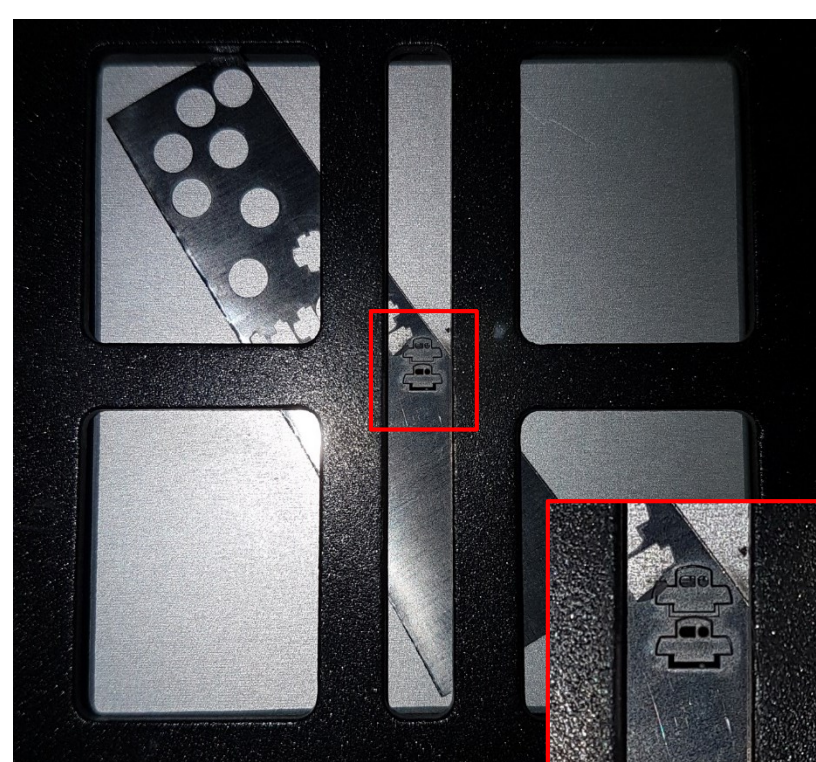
$50 \mu\text{m}$ thick tungsten film mounted onto the microPREP cutting fixture. Custom 3 mm grid has been laser cut, shown outlined in red.
